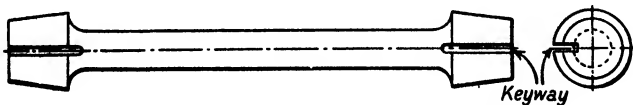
SHAPE OF TORSION TEST SPECIMEN
